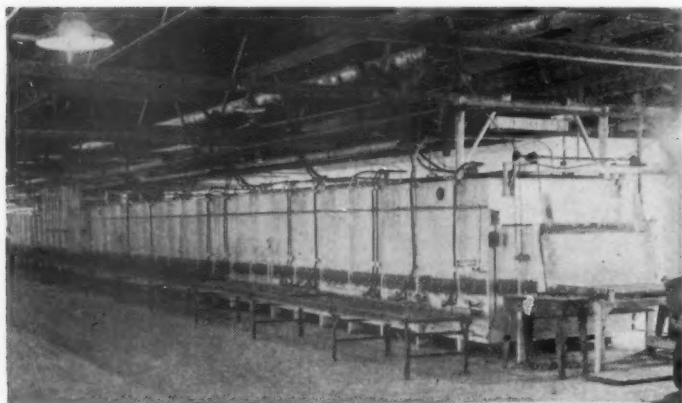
ELECTRIC, ROLLER-HEARTH, ANNEALING FURNACE SHOWING CHARGING END AND TRAY-RETURN CONVEYOR. THIS FURNACE IS 62-IN. WIDE, 28-IN. HIGH AND 120 FT. LONG.
